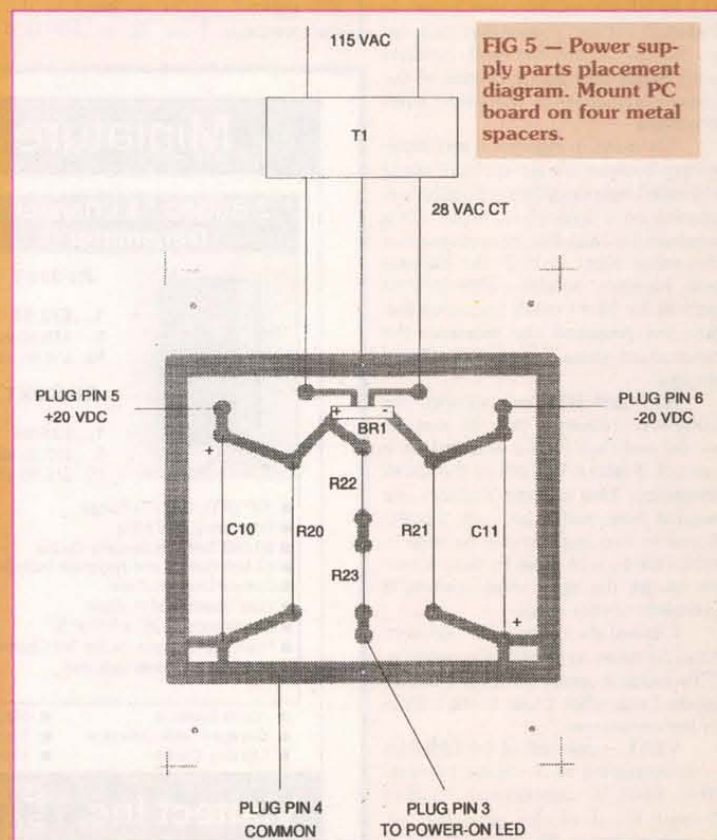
Power supply parts placement diagram. Mount PC board on four metal spacers.
